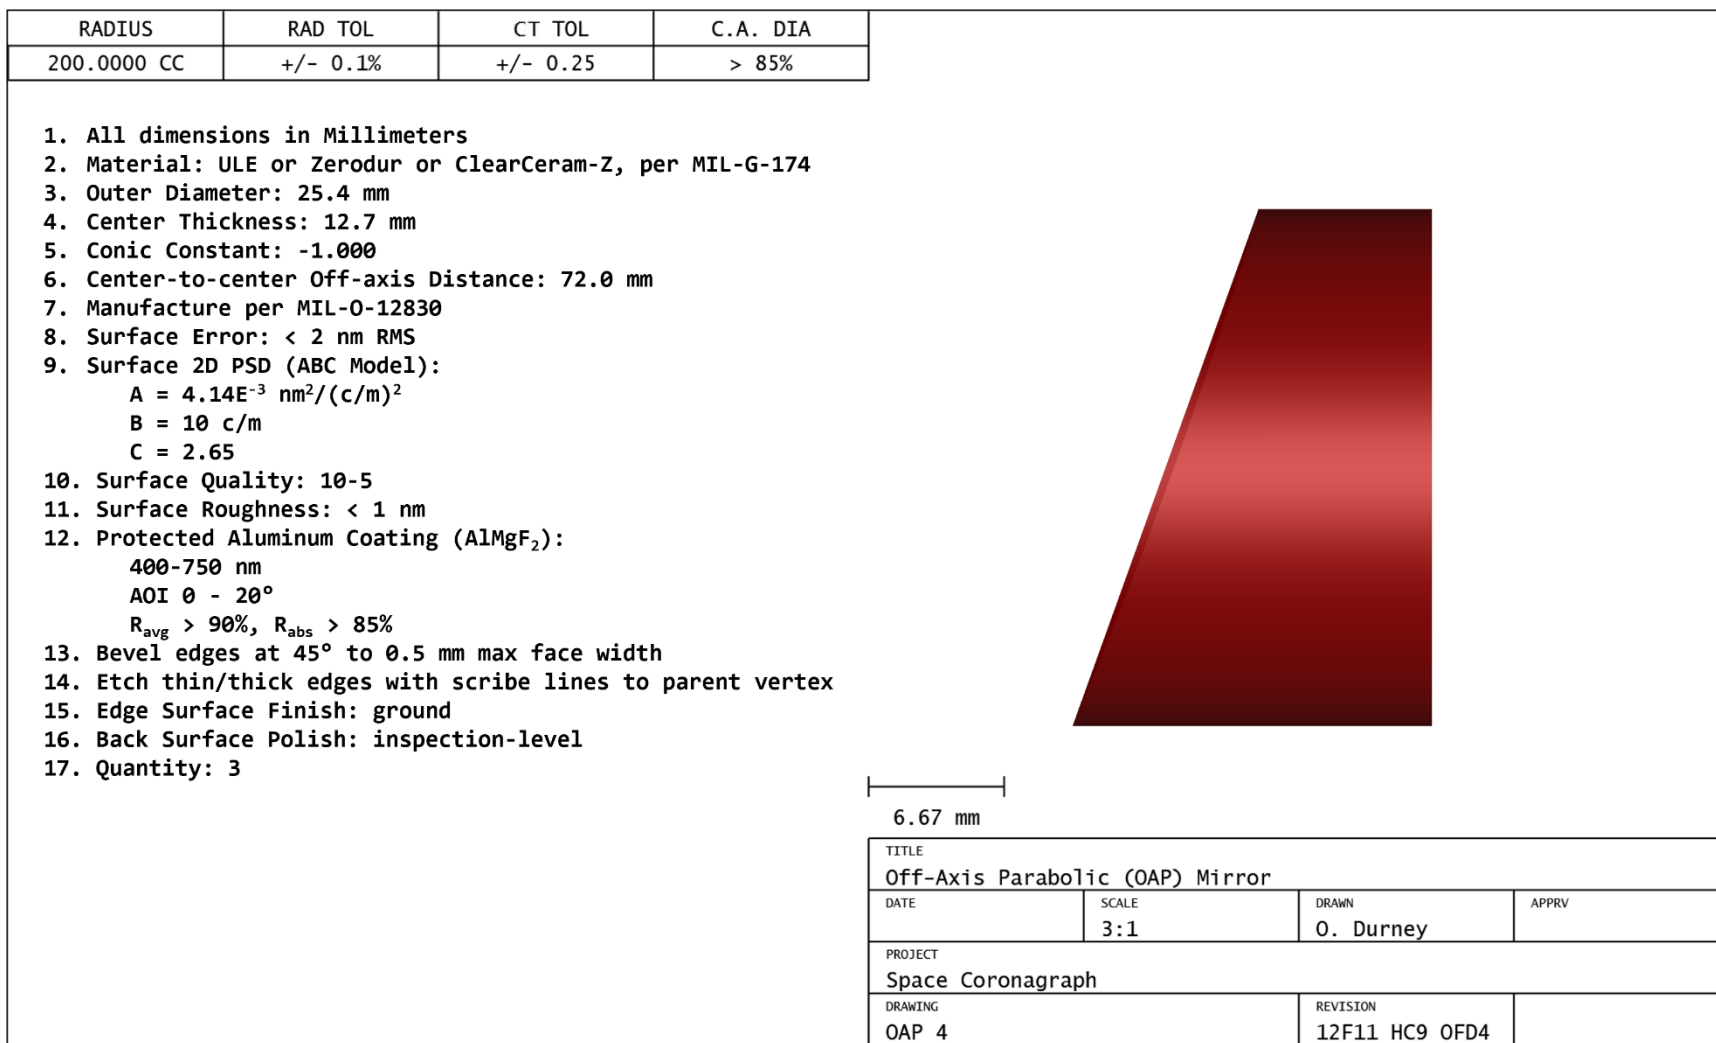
Off-axis parabolic (OAP) mirror 4 drawing
